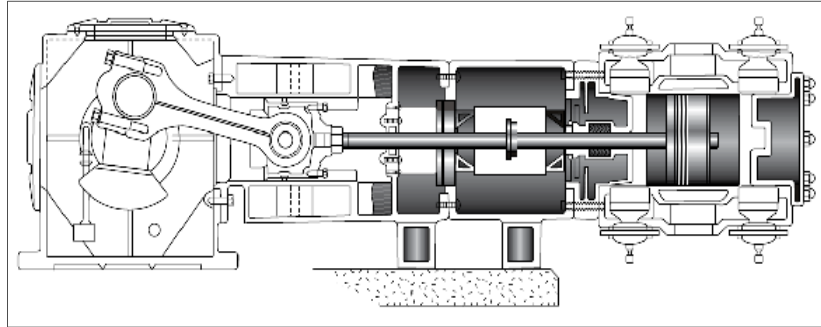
Non-lubricated double-acting compressor (CAGI, 1998)
